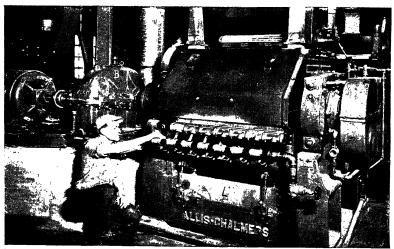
Speed-reducer installations. The speed reducer transmits power fr the motor rpm to the rpm desired for the flaking mill. (Falk.)
